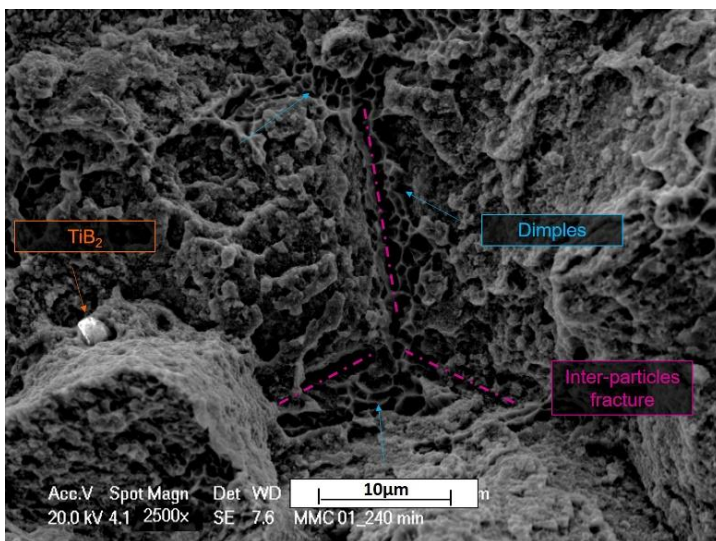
Detail of the fracture surfaces of the sintered MMC-240' specimen.
